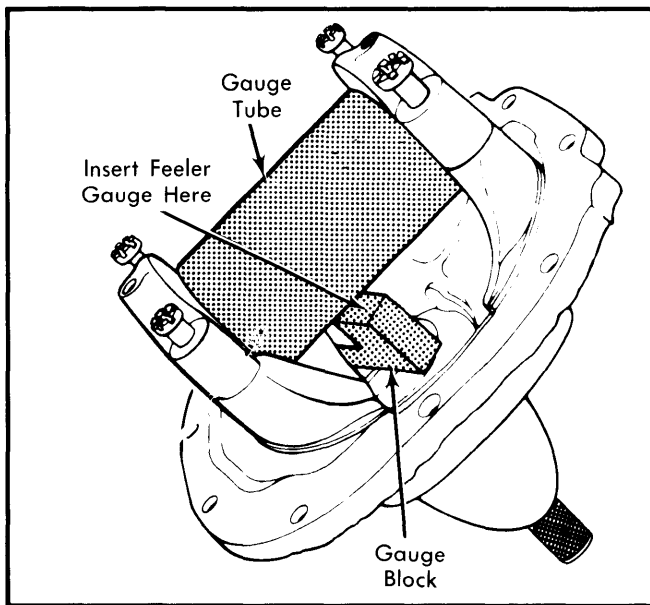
Measuring Pinion Depth With Gauge (T79P-4020-A)
